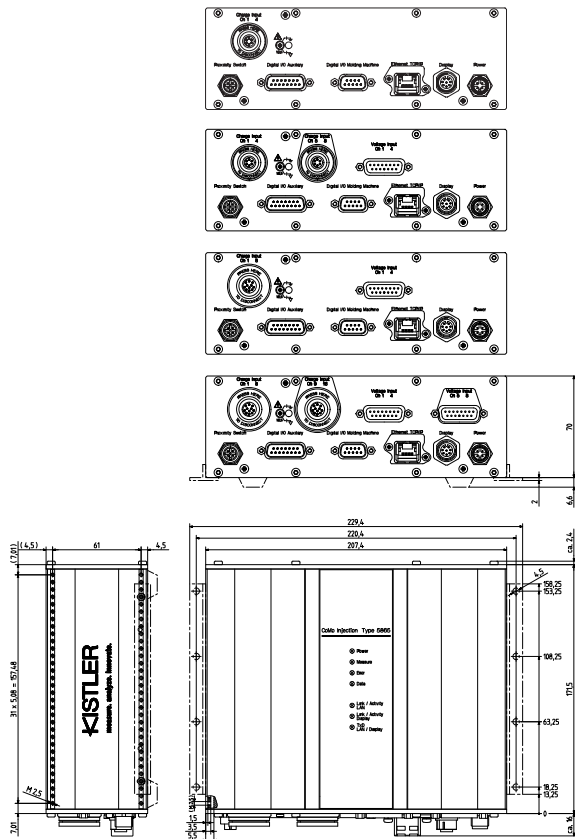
Dimensions CoMo Injection measuring and control unit Type 5865B...
